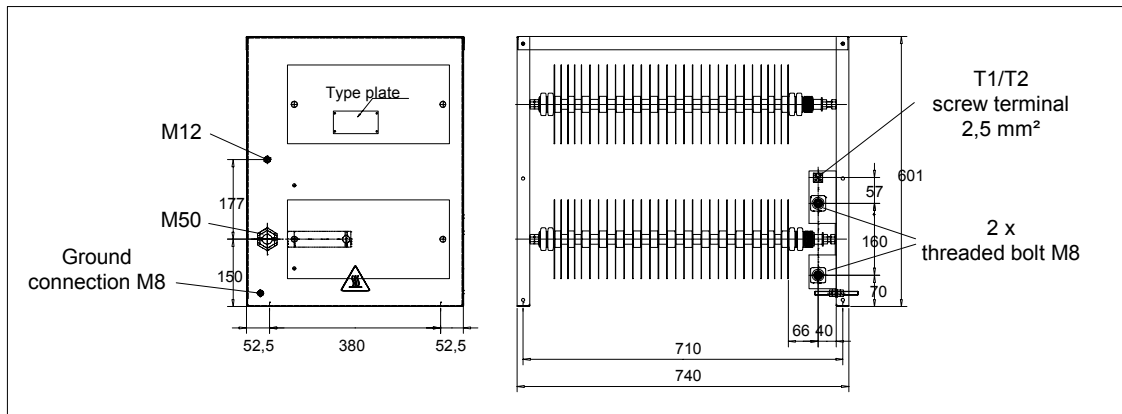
Dimension drawing of the braking resistor for option L61
